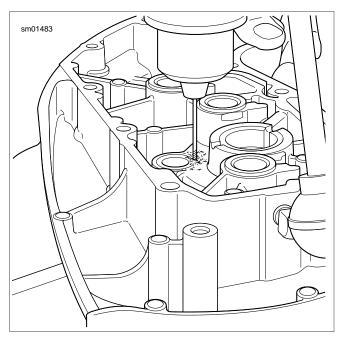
Drilling Pinion Bushing Dowel Pin Hole in Gearcase Cover
